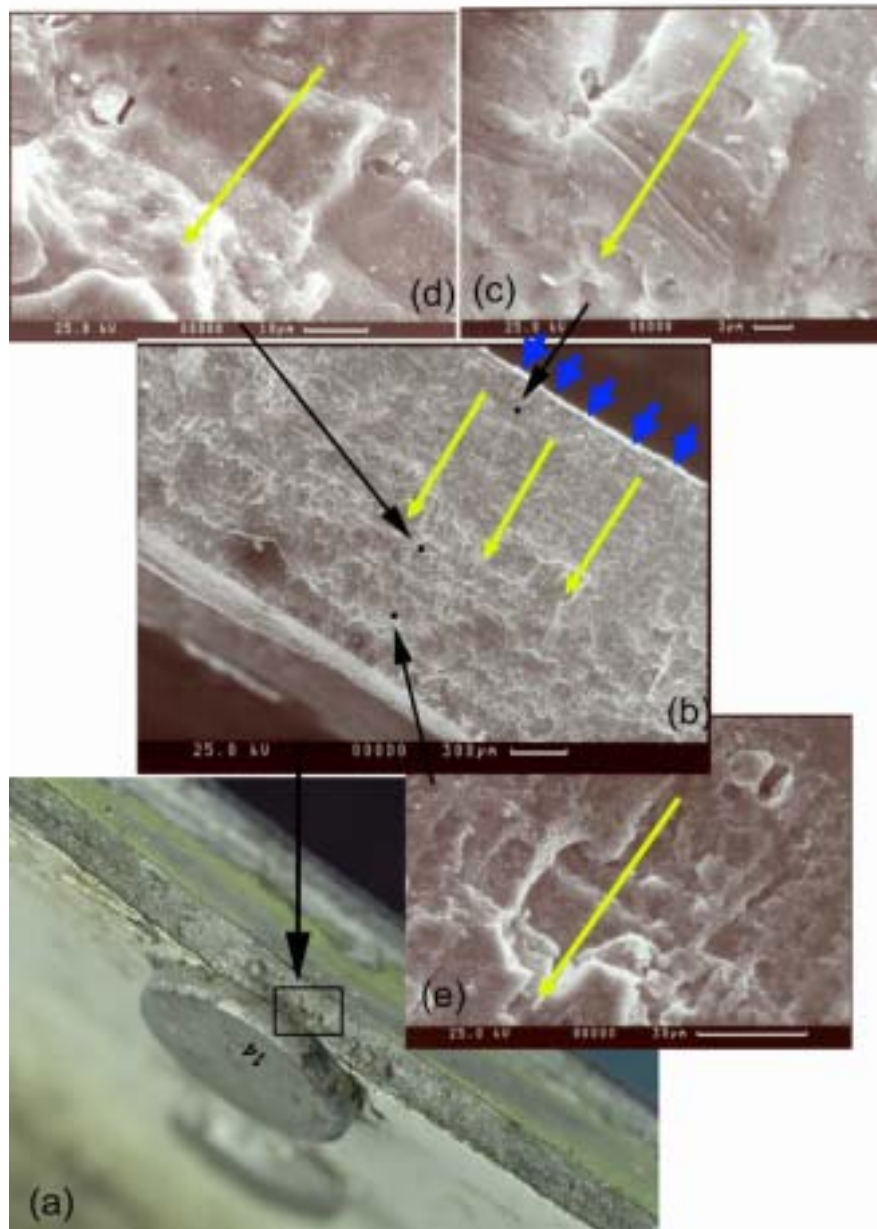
The fracture morphology of fatigue for the area near rivet 14
